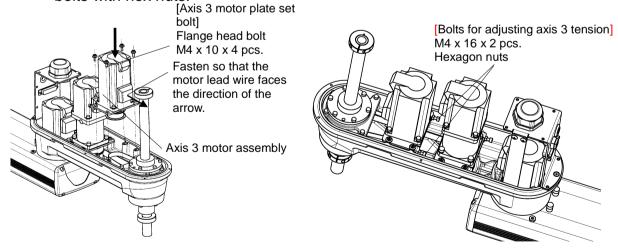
Mounting axis 3 motor assembly (KHL-500, KHL-600, KHL-700)
